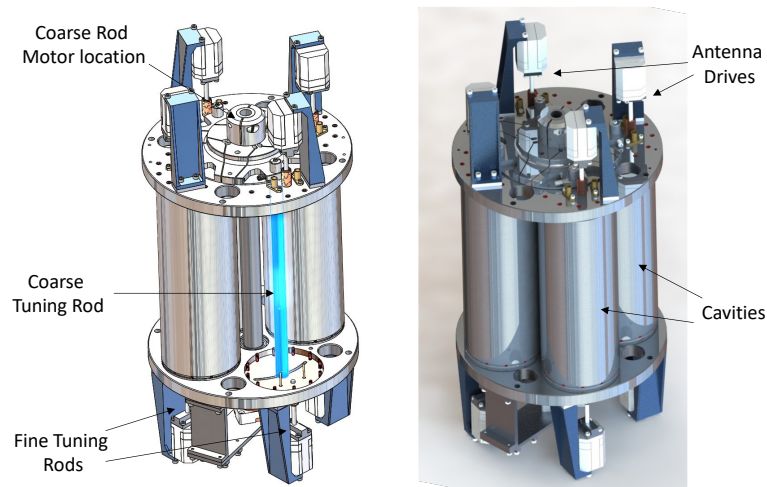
A CAD drawing of the ADMX run 2A cavity array prototype designed and built at the University of Florida
